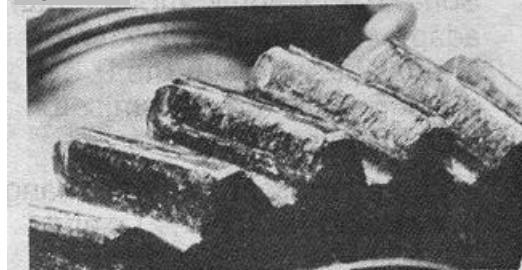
illustrates a typical input gear (driven gear) in a P.T.O. that was mounted too deep-insufficient backlash. Extreme heat turned the gear blue and resulted in gear and bearing failure.
